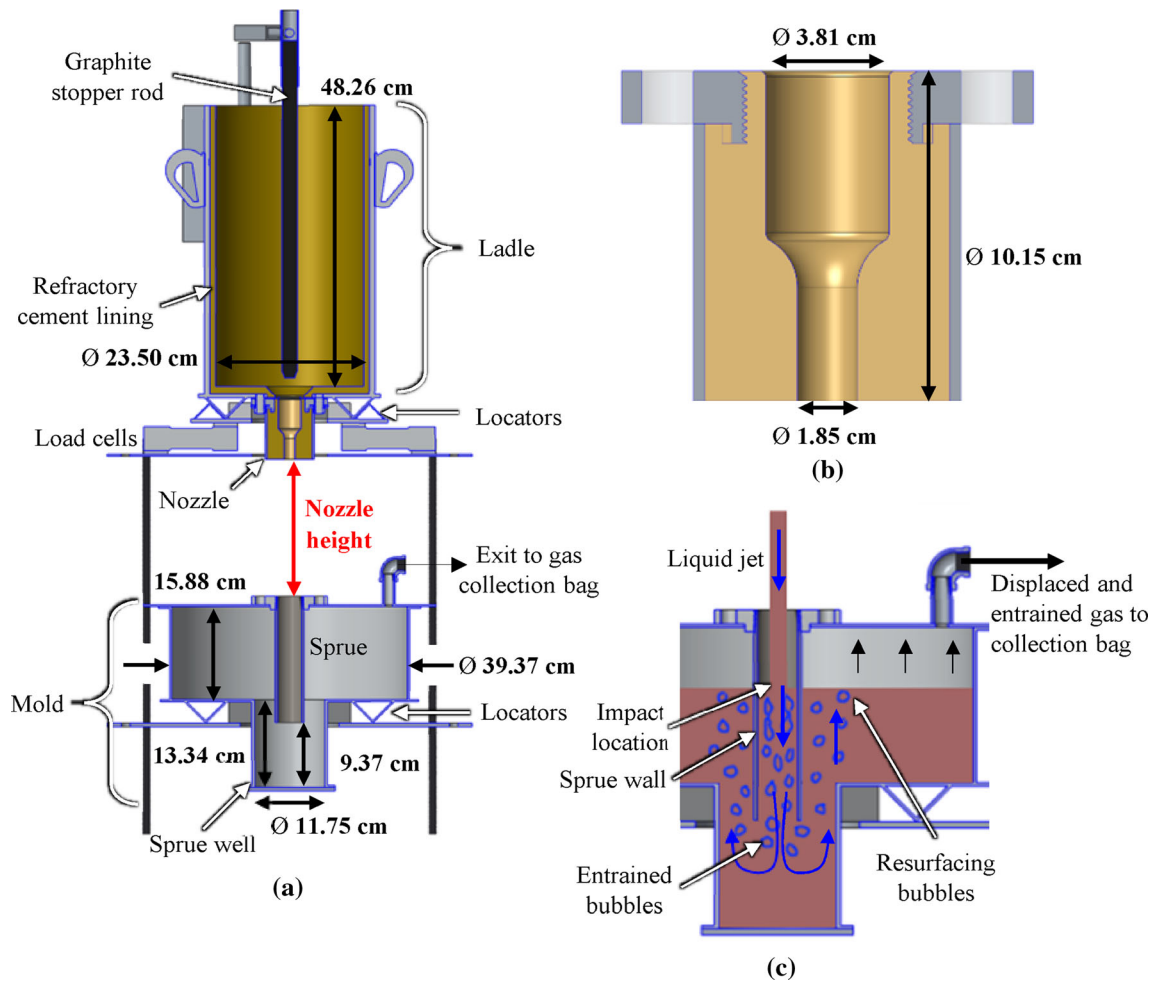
CAD drawings of the ladle, mold and stand (a) used for all experiments. (b) Detail view of the nozzle geometry. (c) Illustration of air entrainment *via* jet plunging into a mold with a sprue. All drawings are vertical mid-sections.
